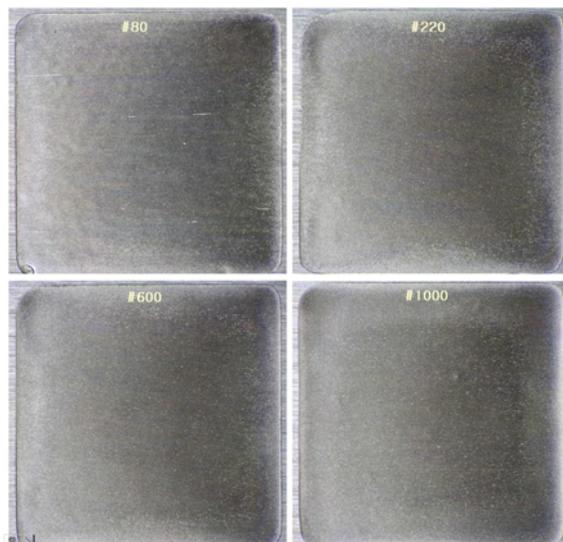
Photograph of electro discharge machined surfaces (with planetary motion of electrode)
